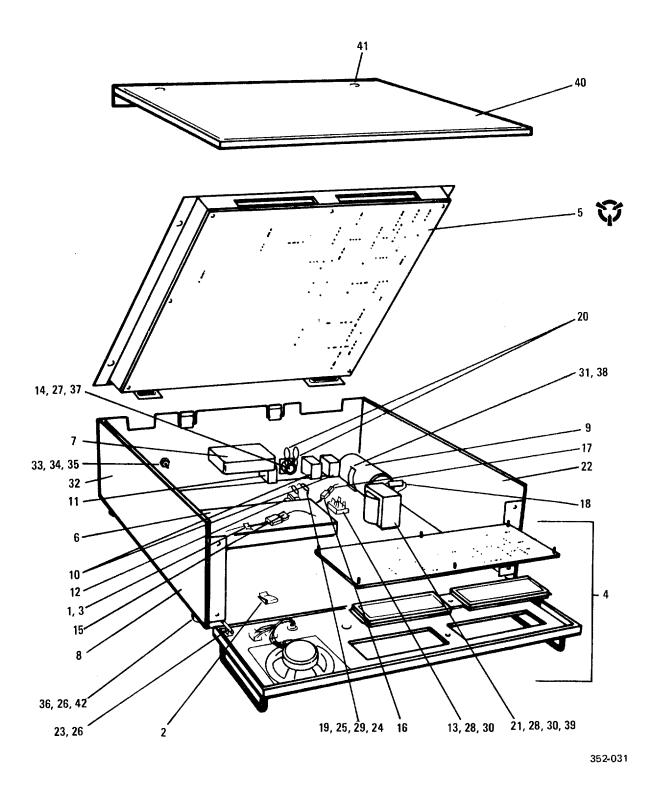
Remote Control Unit, C-11329/URC, Exploded View
